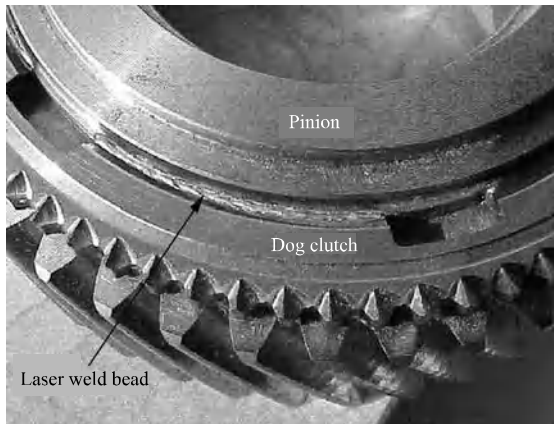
View of the laser weld bead, dog clutch to pinion
